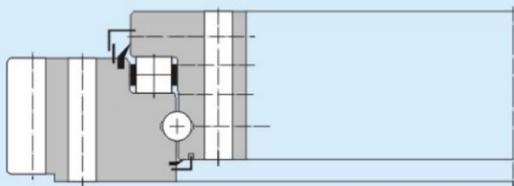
Double-row roller/ball combination slewing bearing with external gear
